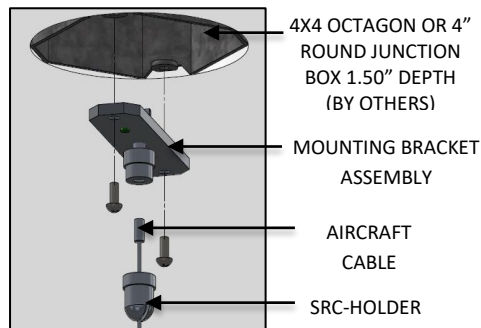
MOUNTING BRACKET ASSEMBLY
